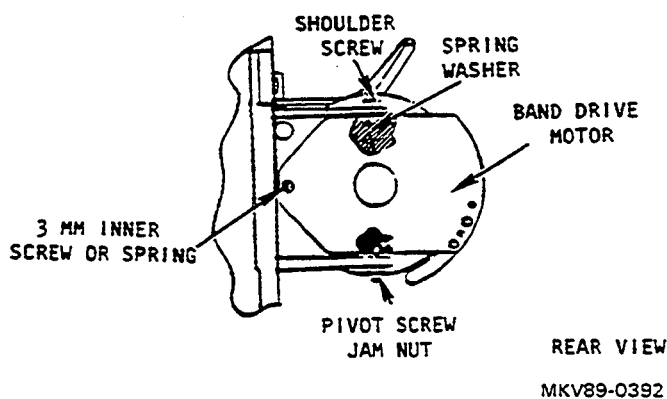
Adjusting the Band Drive Motor Jam Nut
